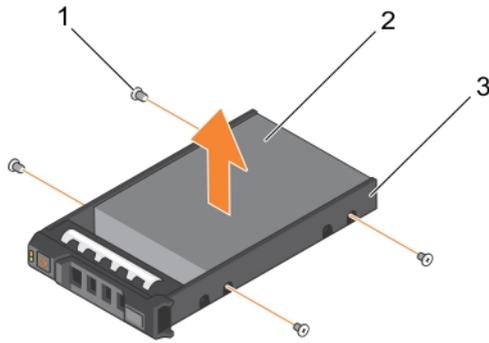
Removing and installing a hard drive into a hard-drive carrier
